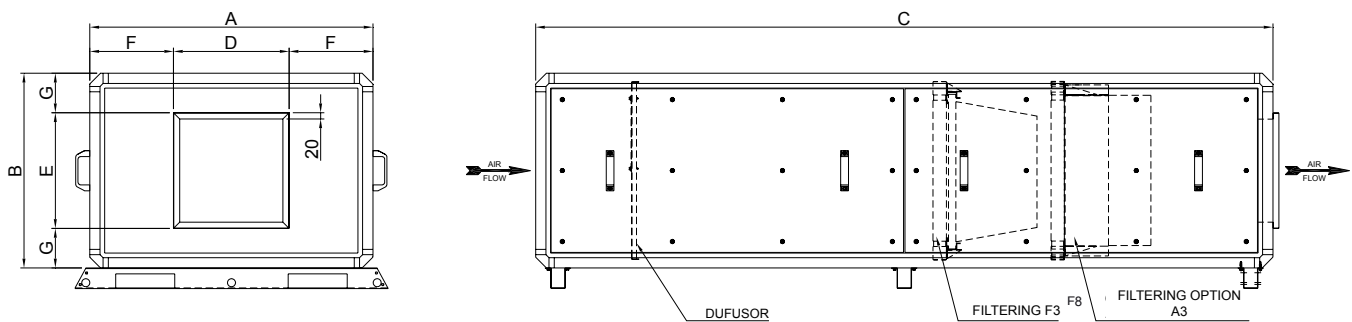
Dimensions Module Final Filter 1 Filtering Stage 05 to 50.
